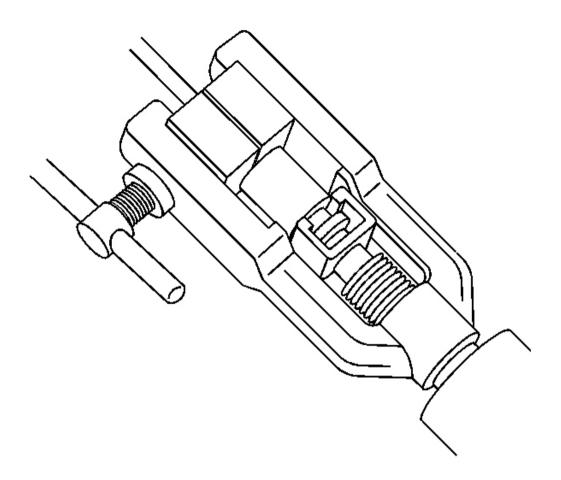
View Of Pipe Flaring Tool Courtesy of GENERAL MOTORS CORP.
